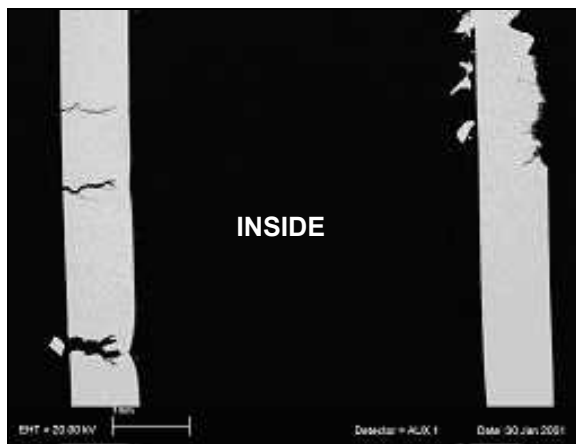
Cross section showing opening crack with plastic deformation on the internal surface.
